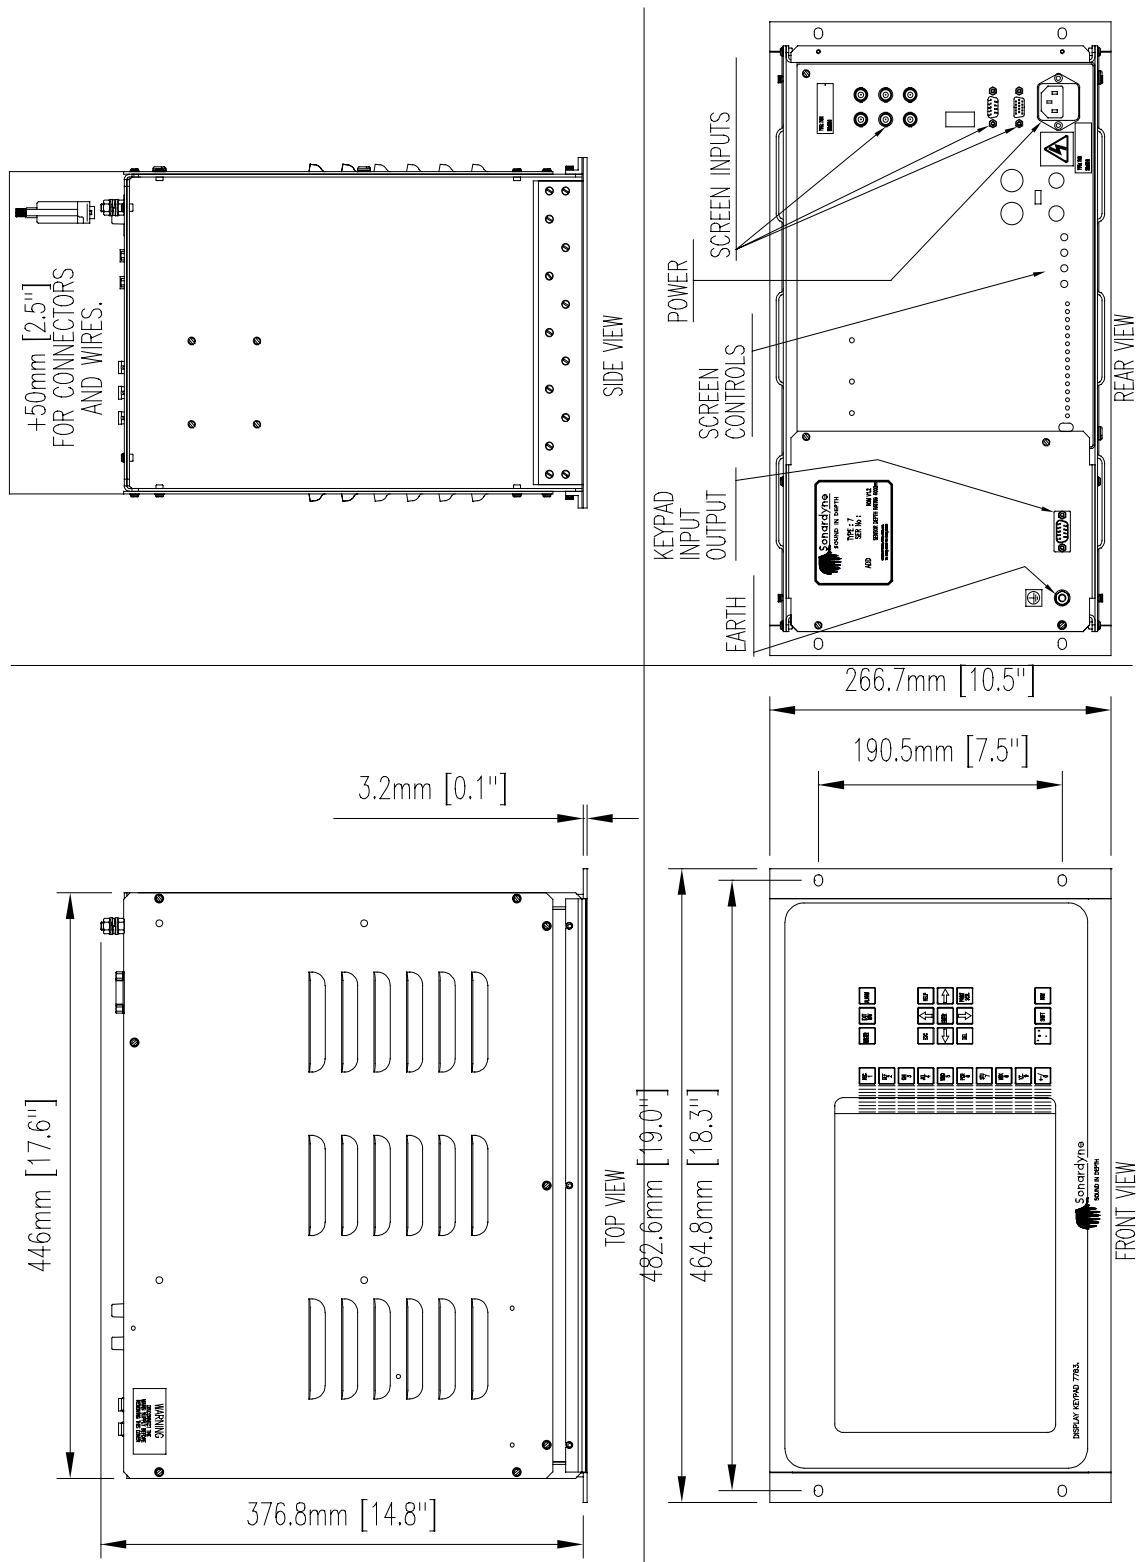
OUTLINE DRAWING TYPE 7783 MONITOR/KEYPAD
